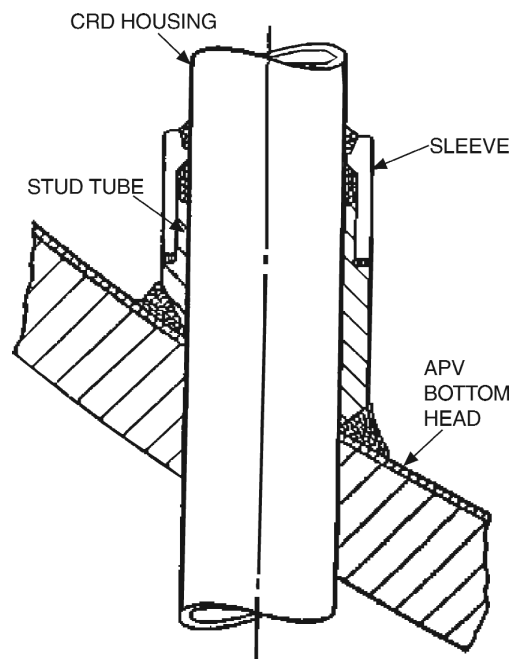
STUB TUBE NARROW GROOVE WELDED PARTIAL DESIGN
